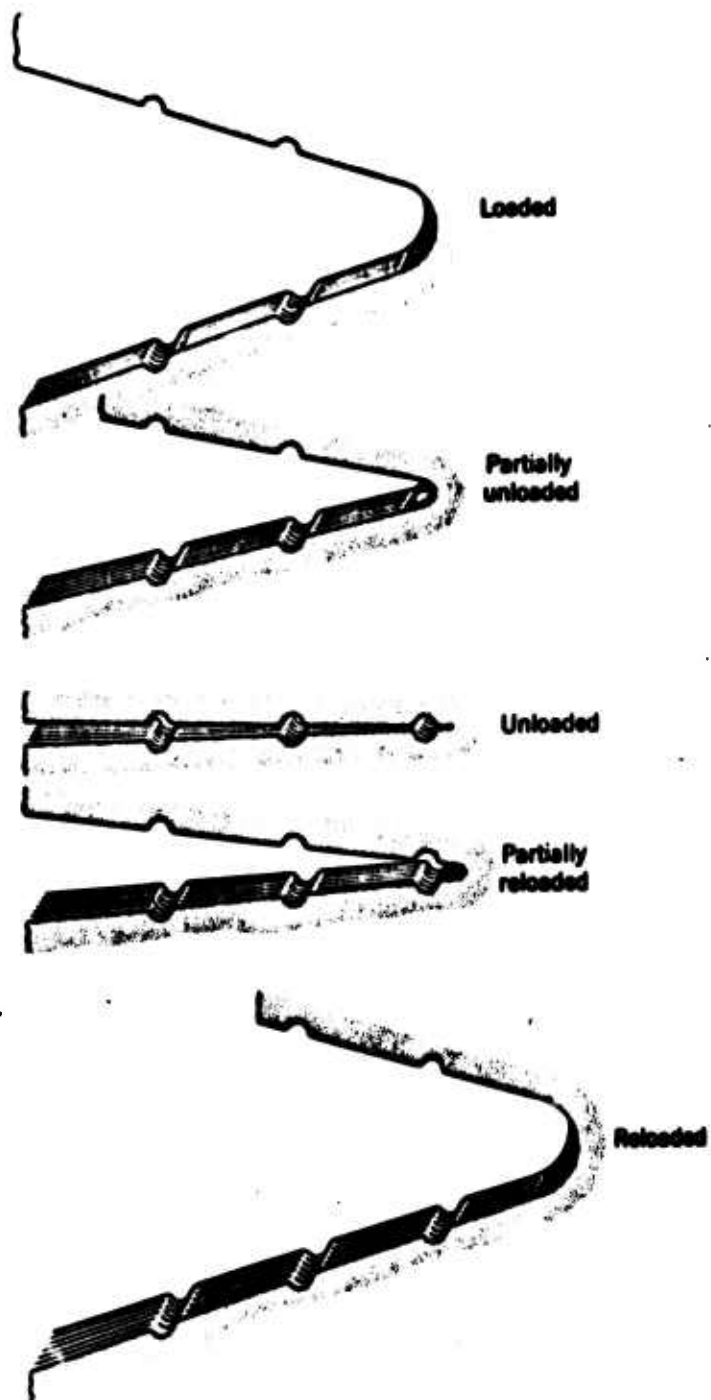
Schematic illustration of the deformation at a fatigue crack tip during one loading cycle.
